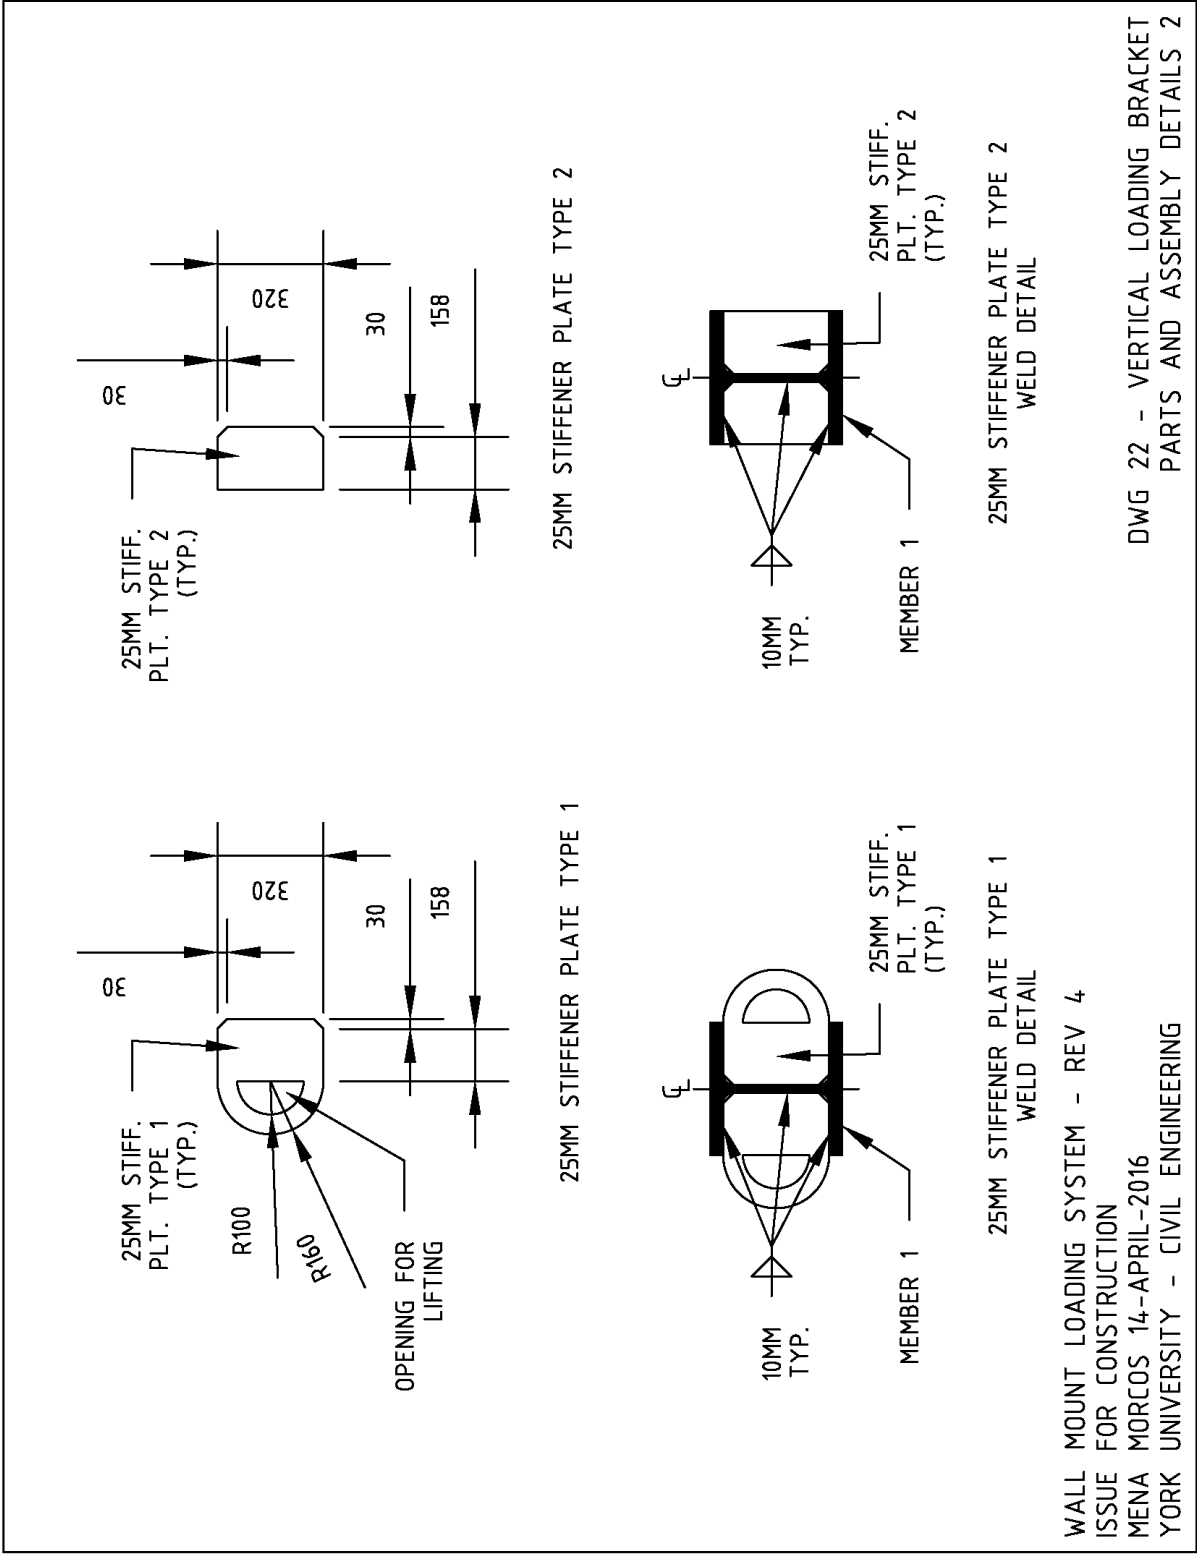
Wall mount loading system design and fabrication drawing – Drawing 22.
